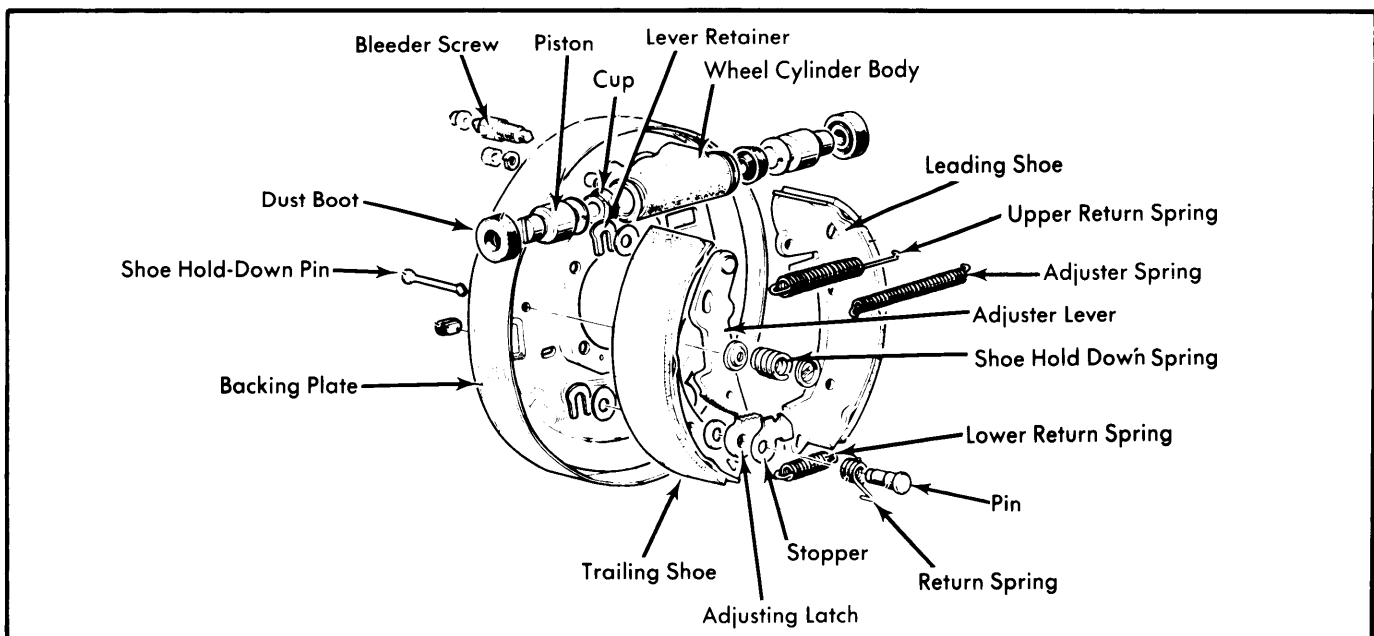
Exploded View of Rear Brake Assembly for Component Relationship (Challenger & Sapporo Shown, Others Similar)
